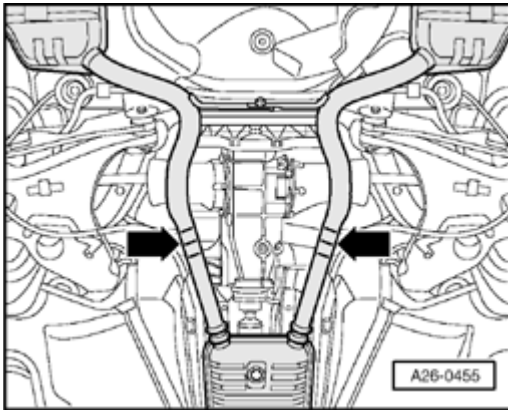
Separating Exhaust Pipes At Separating Point Using Chain Pipe Cutter VAS 6254 At A Right Angle
